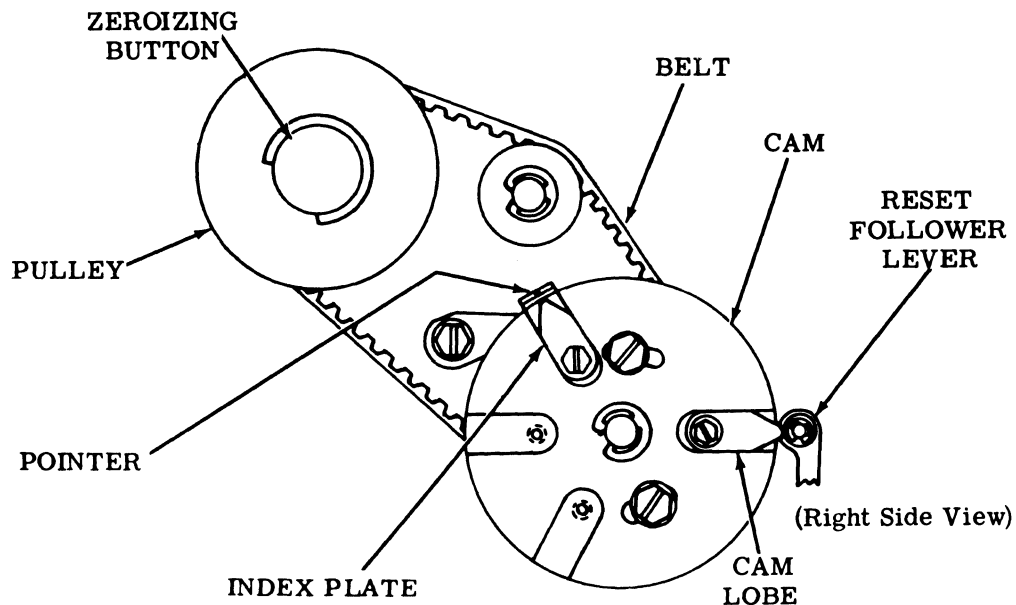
Zeroizing Position of Platen Drive Mechanism — One Cam Lobe Operation
